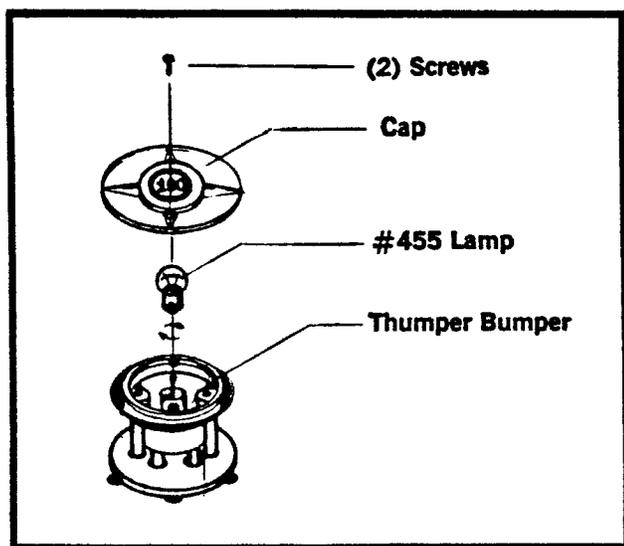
Thumper bumper lamp replacement. Use a 455-type bulb.
